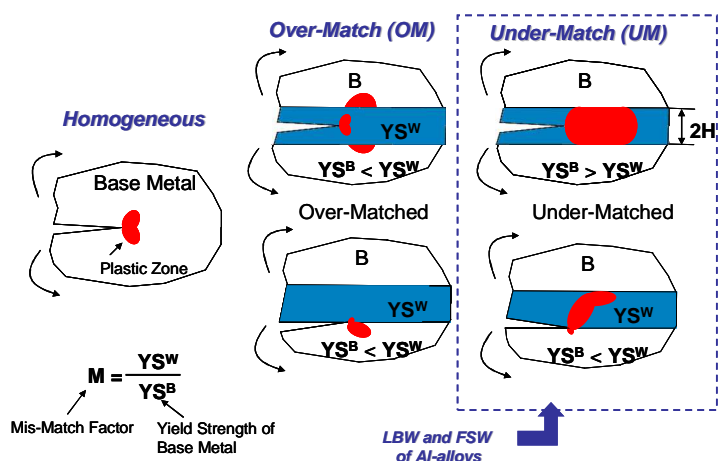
Schematic description of crack tip plasticity due to weld strength mis-match. LBW: Laser Beam Welding, FSW: Friction Stir Welding
